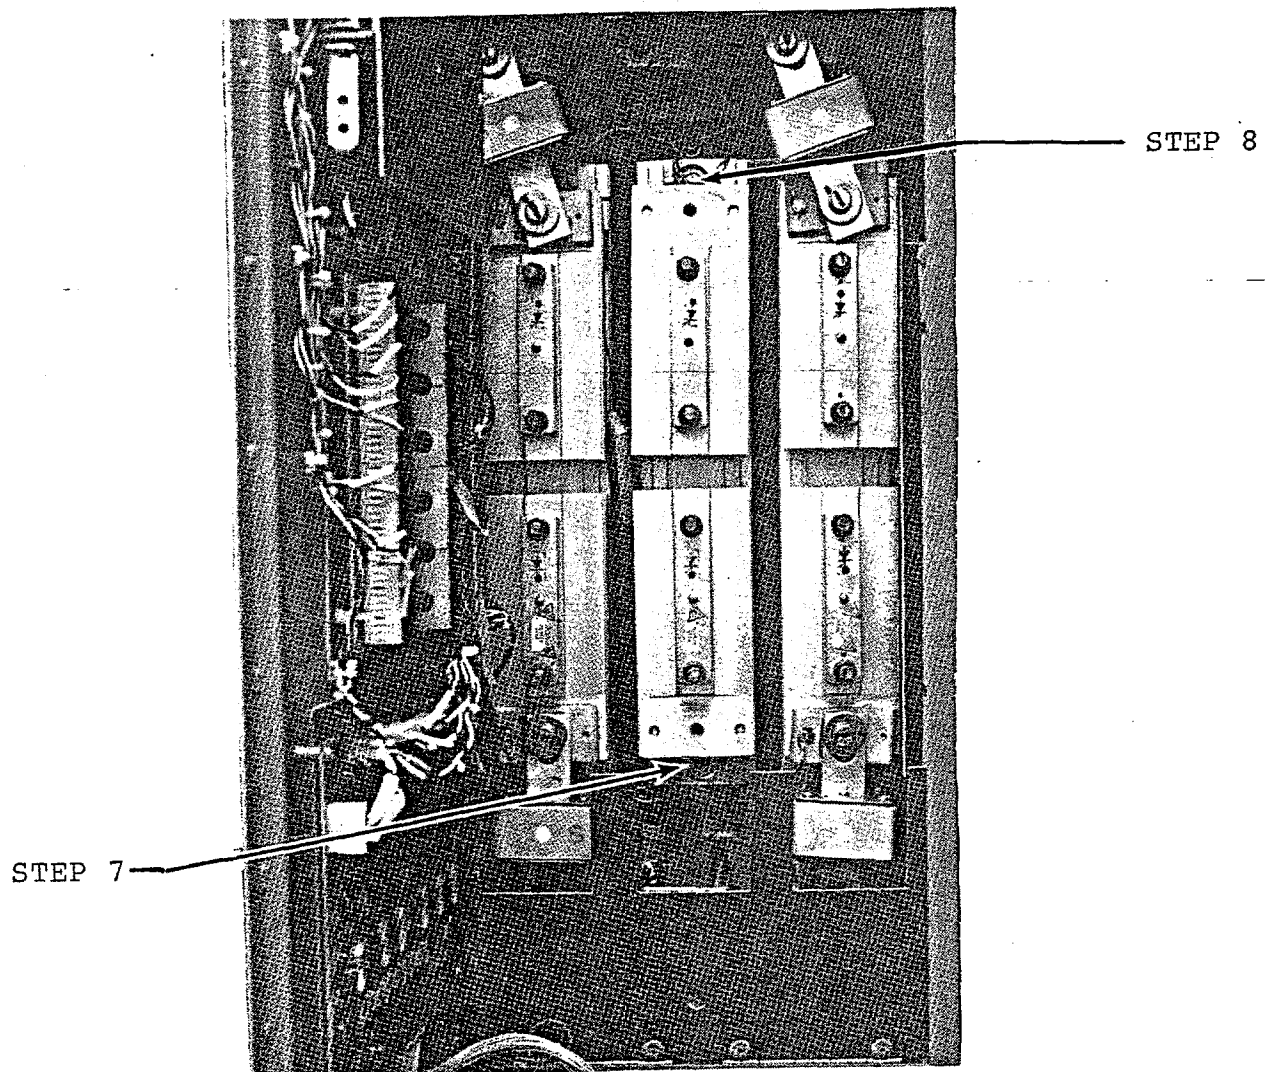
PCM CELL STACK ASSEMBLY READY TO BE REMOVED
